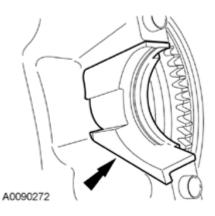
Locating Starter Motor Isolator Courtesy of FORD MOTOR CO.
